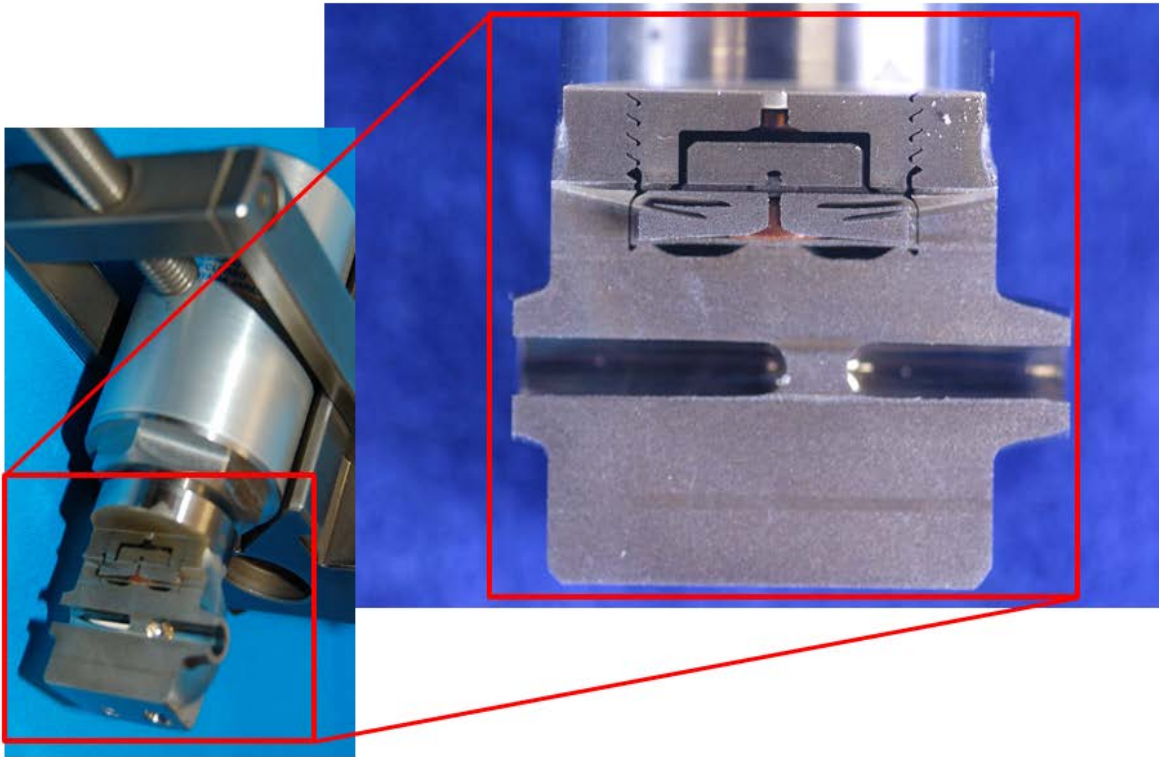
EDM Valve along with a detailed image of the cross section of the body
